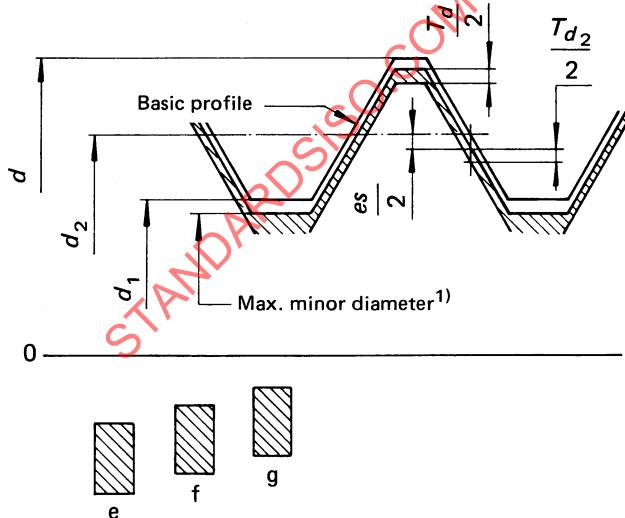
Bolt threads with tolerance positions e, f and g
